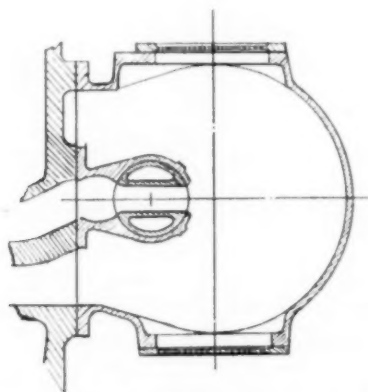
SULZER ROTARY SCAVENGE VALVE
